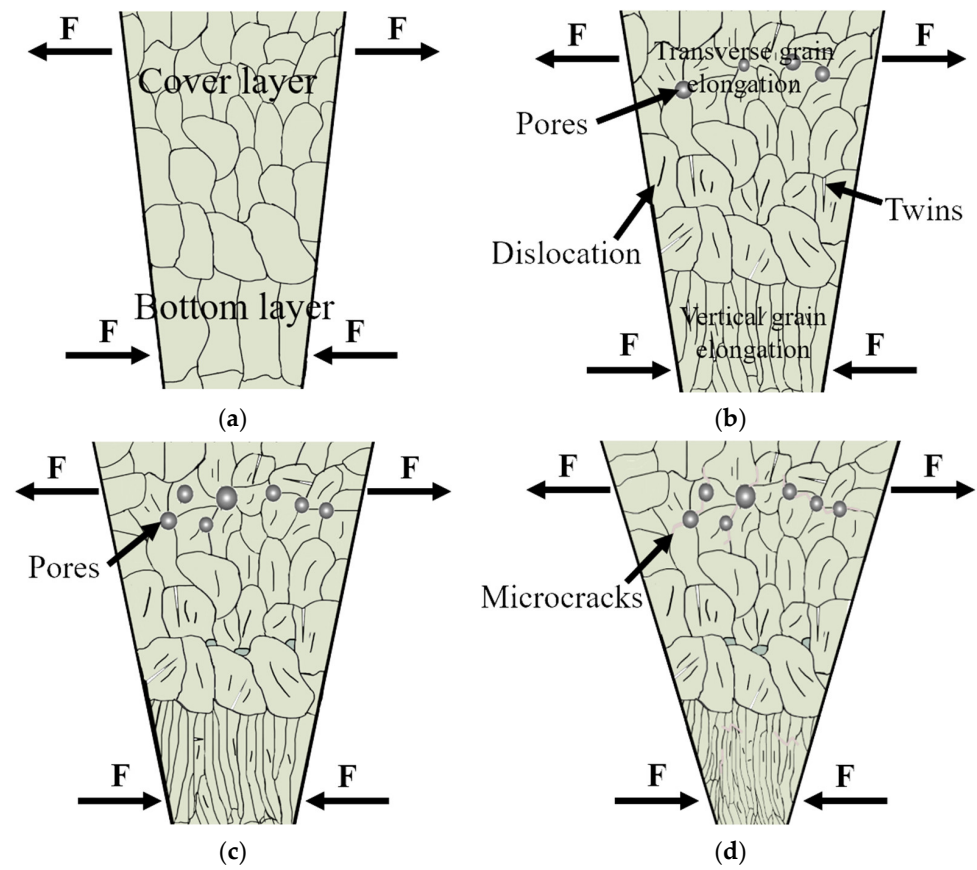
Schematic drawing of bending fracture mechanism of welded joint. (a) The microstructure of the welded joint at the bending start stage, (b–d) the microstructure of the welded joint during the bending test.
